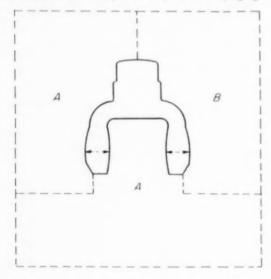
shows design of one of the test dies, a three-piece composite die. Sections marked A were made of high-carbon high-chromium toolsteel pack hardened in the conventional manner from 1850° F. The die section marked B was treated by the new short cycle from 2100° F.; arrows indicate the sections measured with a micrometer.
